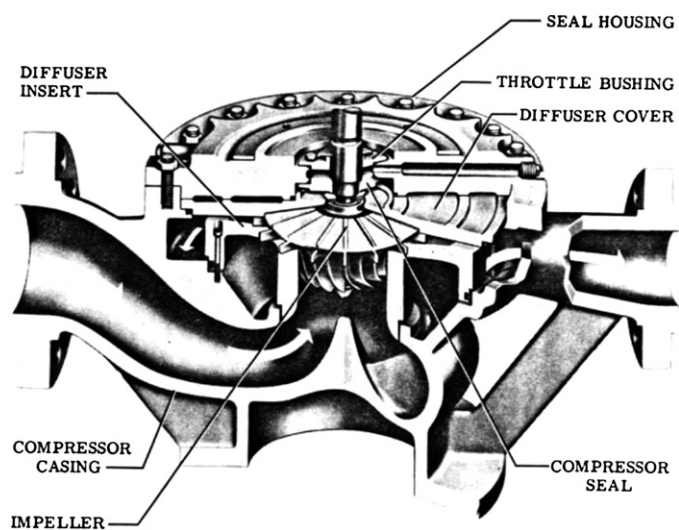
• Single stage high-speed compressor (gear box and motor removed) (Courtesy of Sundstrand Corp.)
